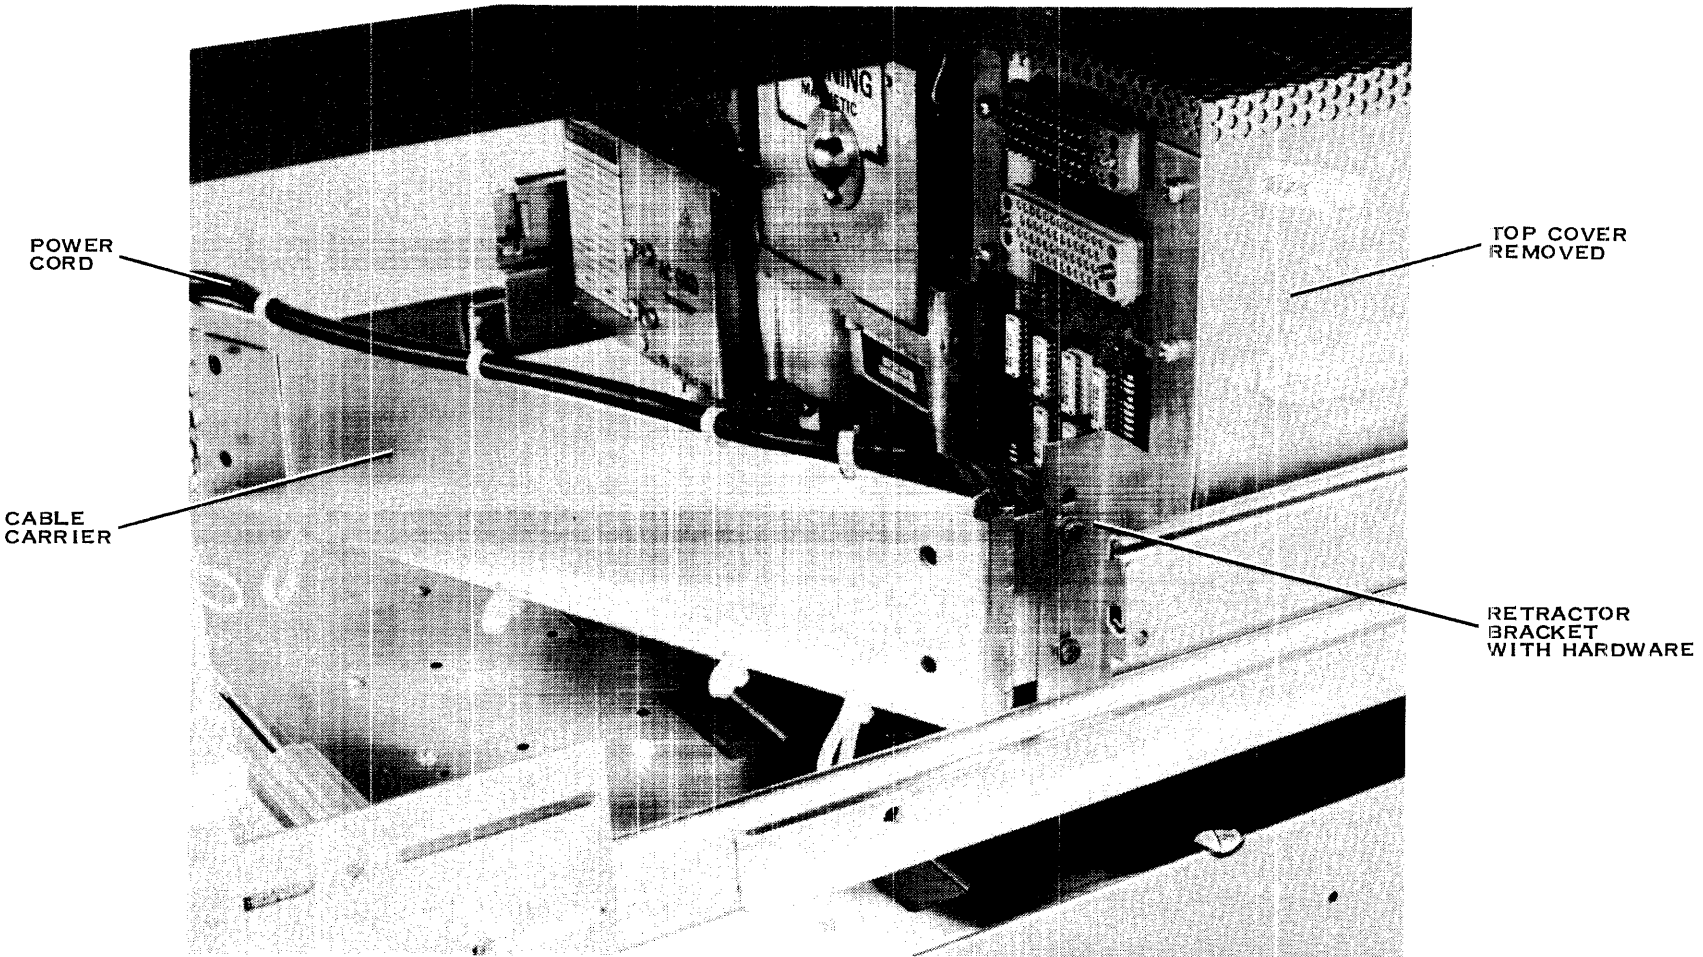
Rackmount DS10 Showing Cable Carrier and Cable Retractor Bracket
